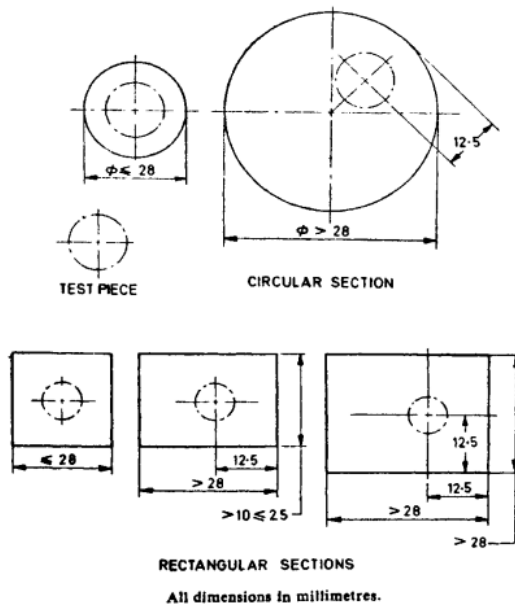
LOCATION OF THE TENSILE TEST PIECES IN THE PRODUCTS
